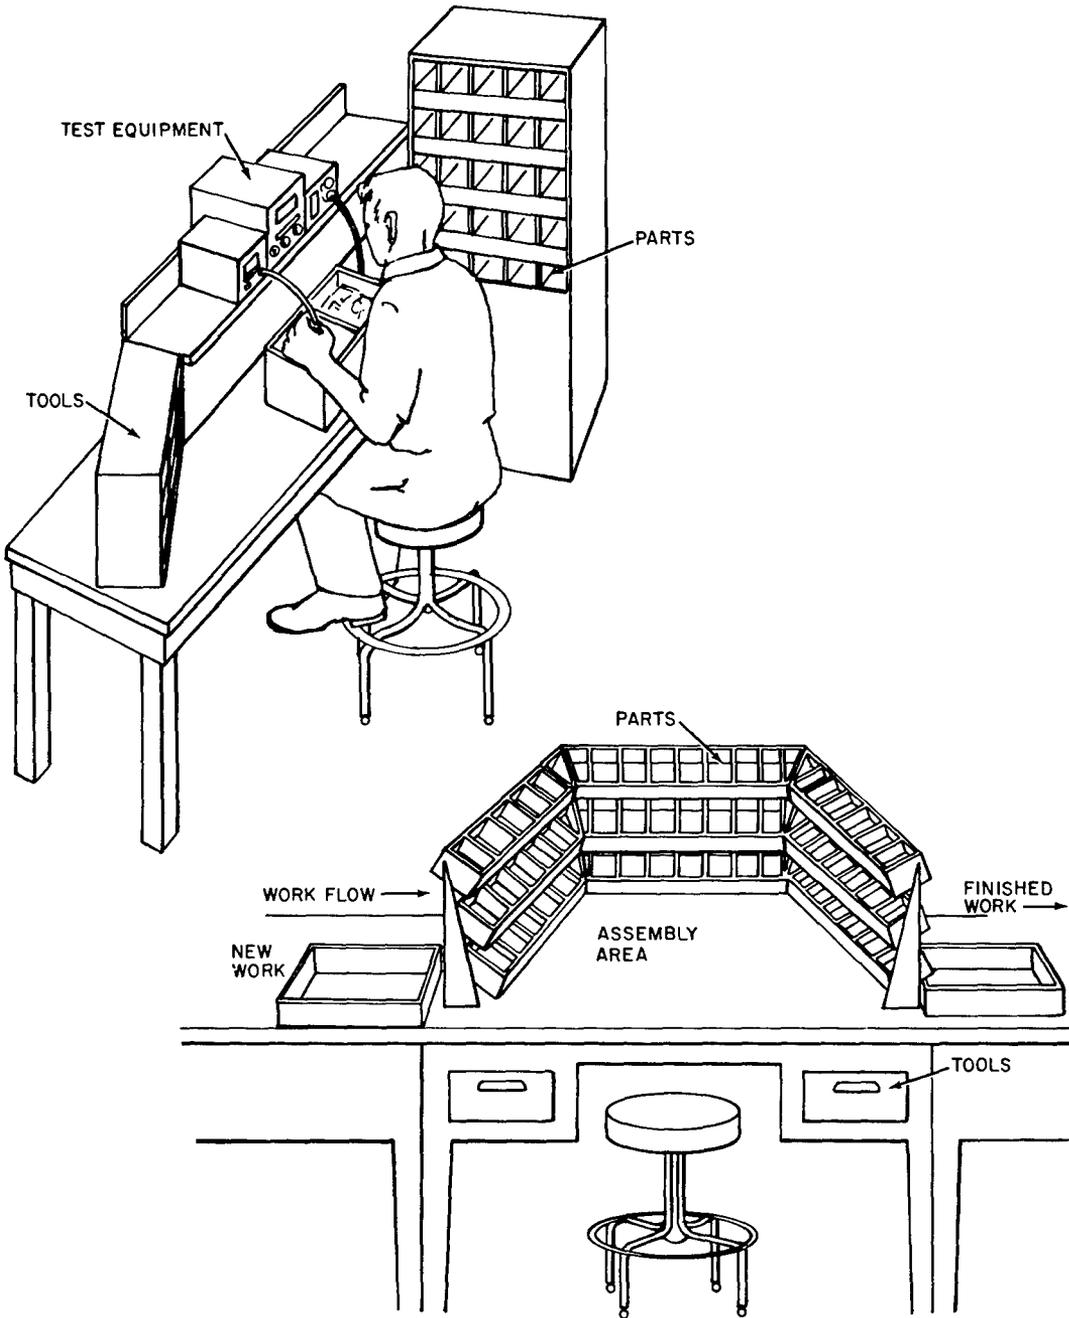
Concepts for layout of test equipment, parts, and tools.
